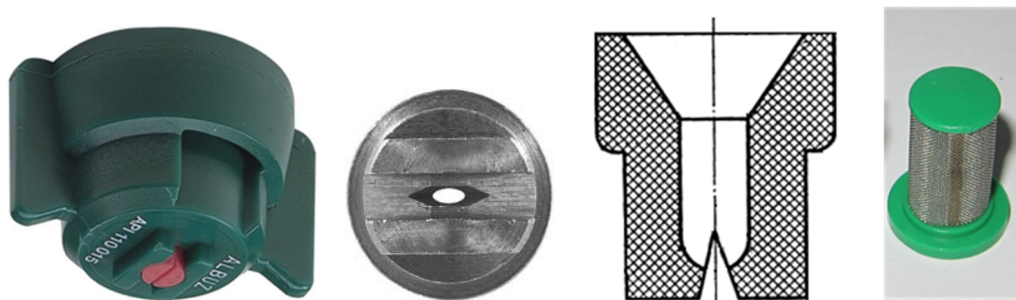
General view and principal design arrangement of the slit-type nozzle and the filter.
